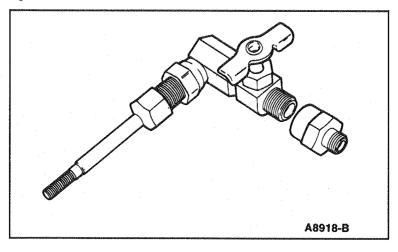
T83T-9000-A Fuel Transfer Pump Pressure Adapter
